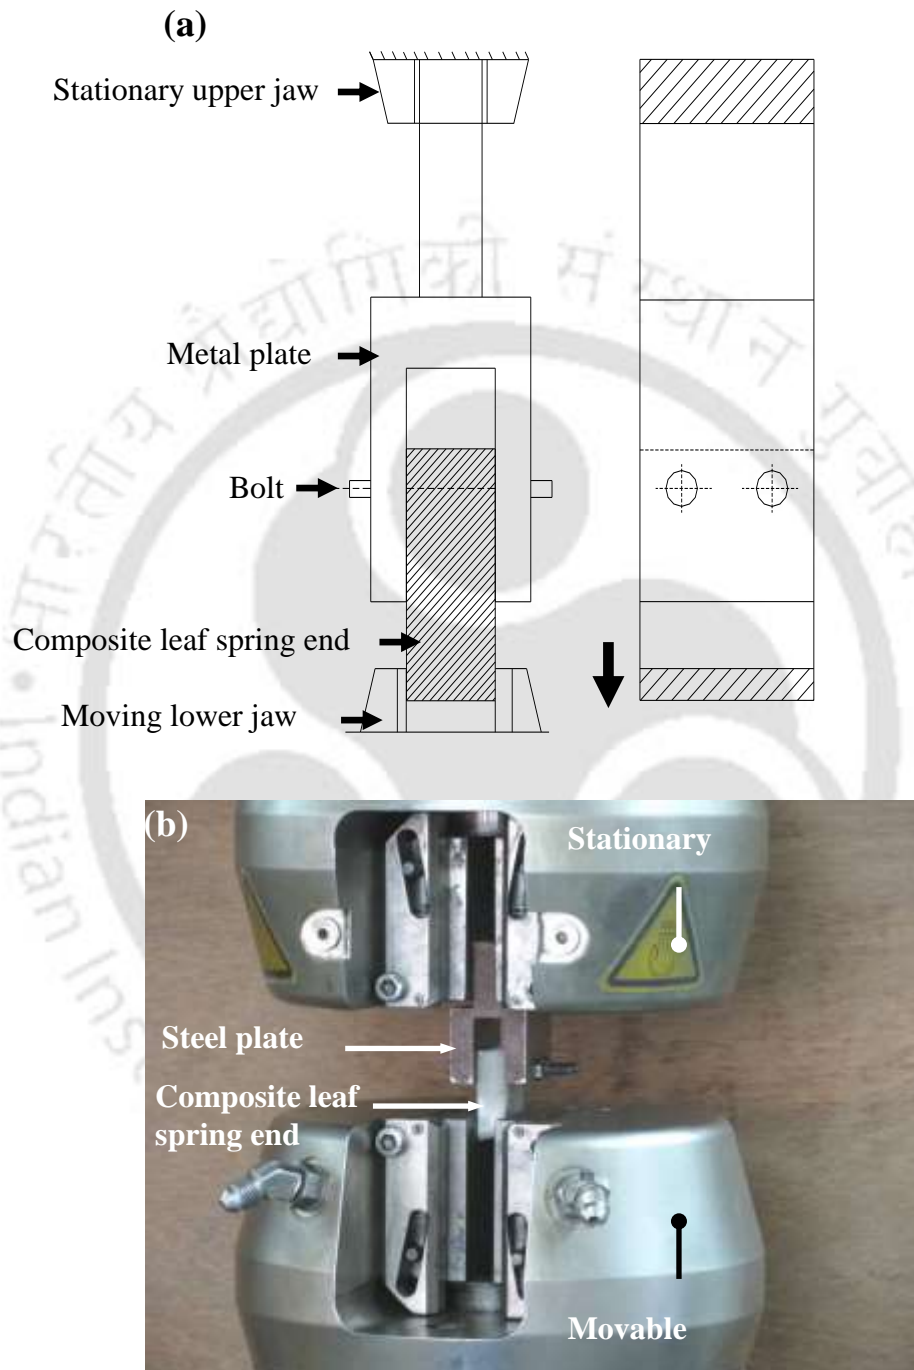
Experimental test setup to evaluate the performance of bolted end joint of leaf spring end (a) schematic figure (b) view of fixture holding leaf spring end and steel plate
